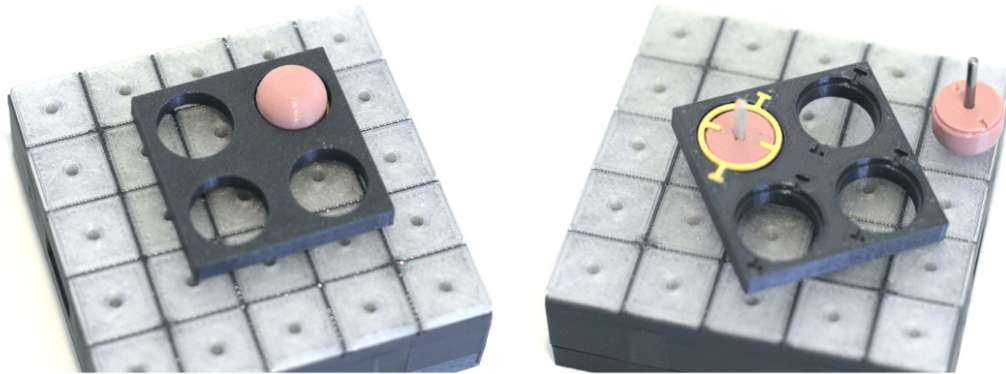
Mockup 1 3D printed bottom on the left, top on the right.
